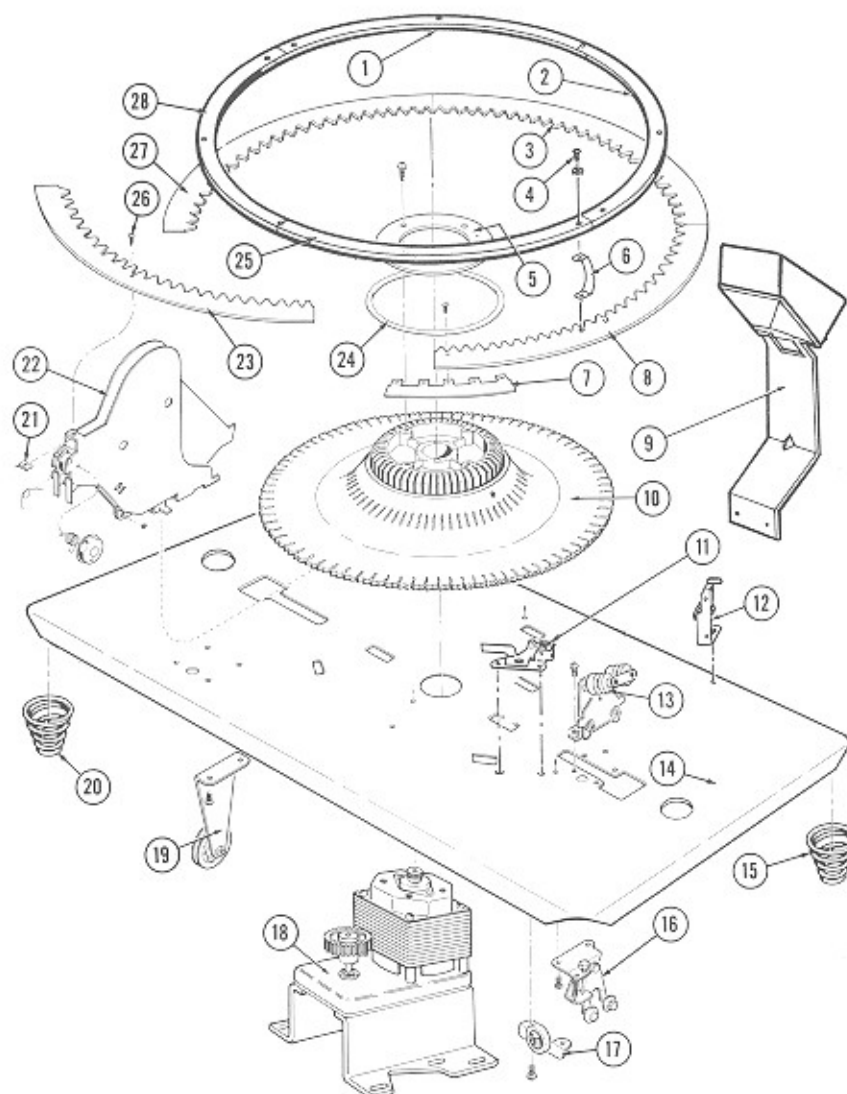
RECORD CARRIER AND CHASSIS MOUNTING PLATE - 2800
